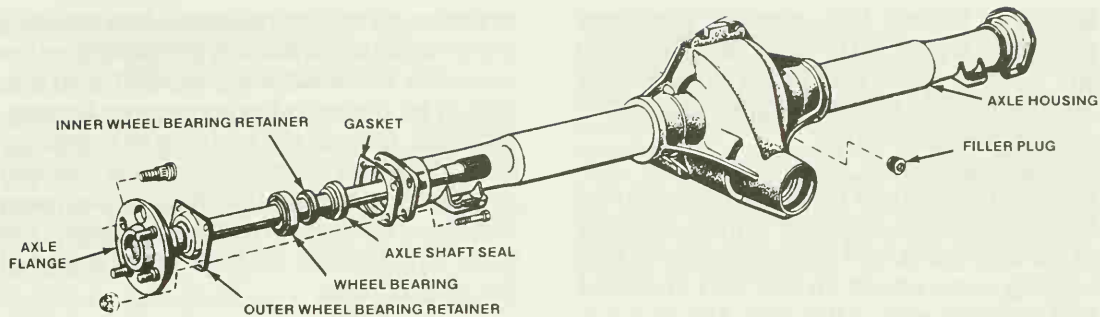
The inner retainer must be removed to replace the bearing. (Chevrolet Motor Division of General Motors Corporation)
